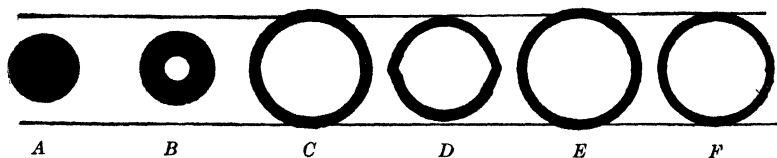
XV.—Sketches of a cross section of a piece after various steps in the production of the finished seamless pipe. *A*, original billet; *B*, after piercer; *C*, after expanding mill; *D*, after plug mill; *E*, after reeler; *F*, after sizing mill.
